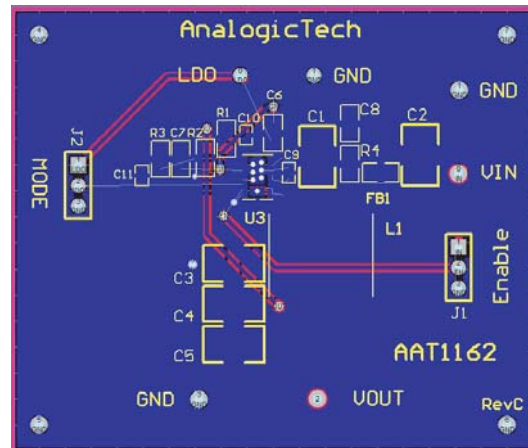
AAT1162 Evaluation Board Solder Side Layout.
